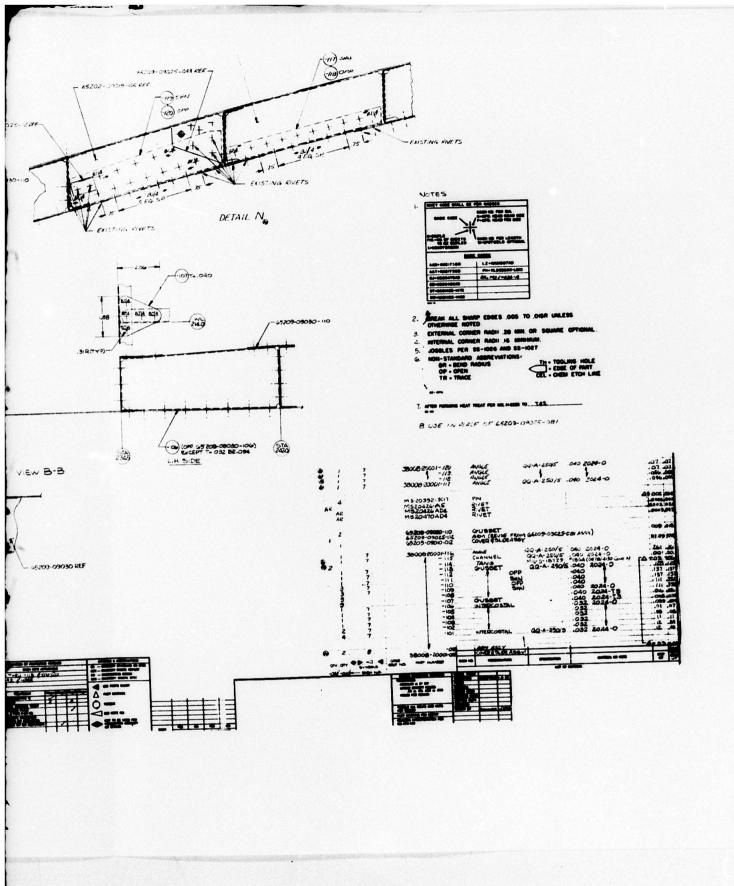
Redesigned Main Rotor Pylon Hinged Cover. (Drawing 38008-20001, Sheet 1).
